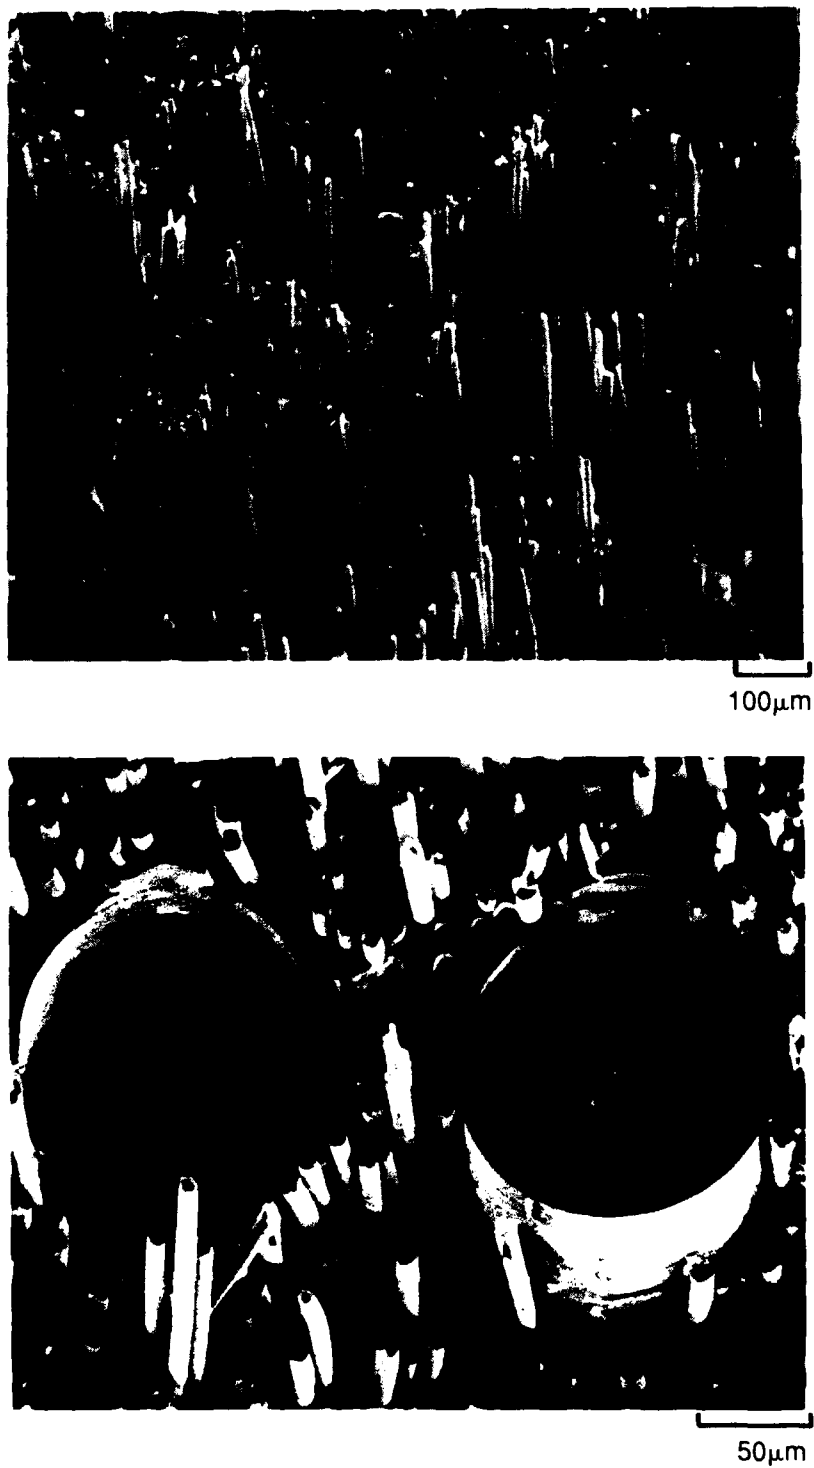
Tensile fracture surface of a B_4C -coated boron/P-100/glass composite. Degradation of the core/mantle interface is evident in (b).
